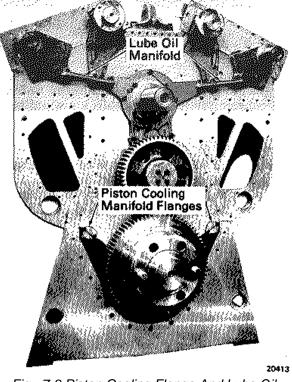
Piston Cooling Flange And Lube Oil Manifold Application
